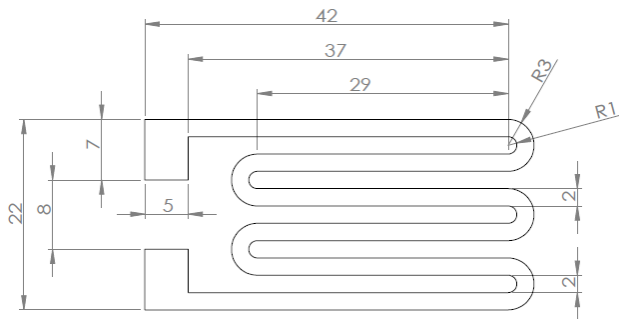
Dimension of the strain gauge sensor (units in mm).
